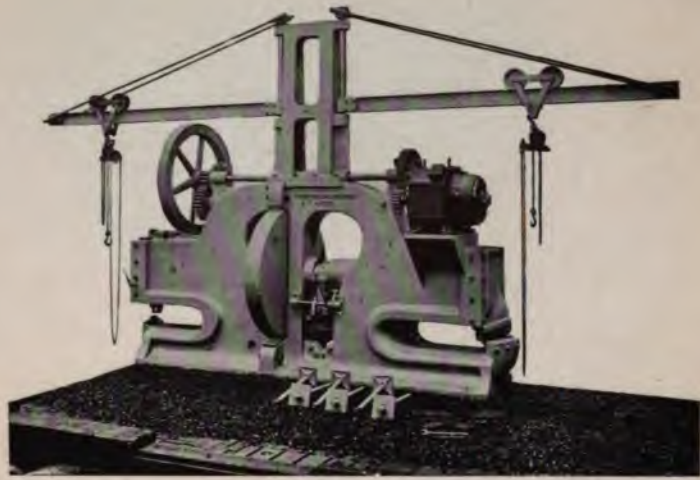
ECCENTRIC PUNCHING AND SHEARING MACHINE. (Fairbairn Macpherson.)
